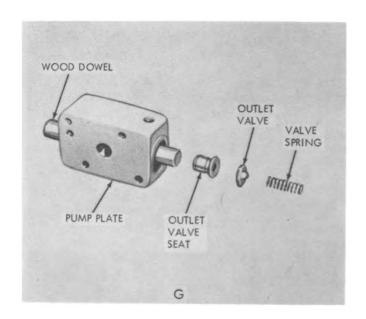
Traversing gearbox pump disassembly or assembly (1 of 2).
